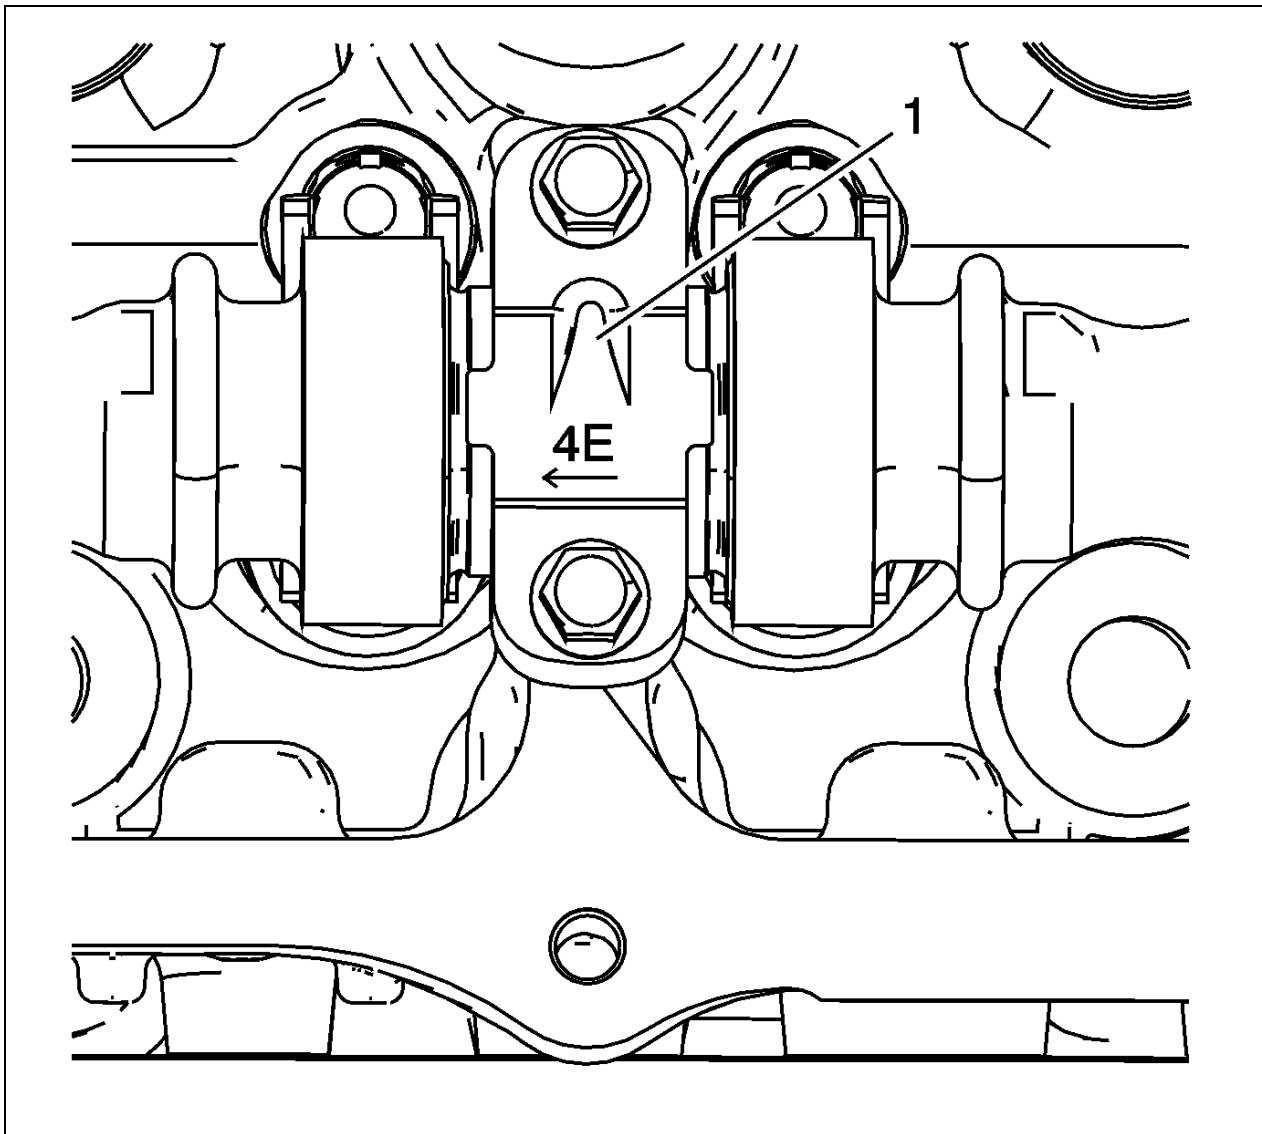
View Of Camshaft Flats Parallel With Camshaft Cover Rail
